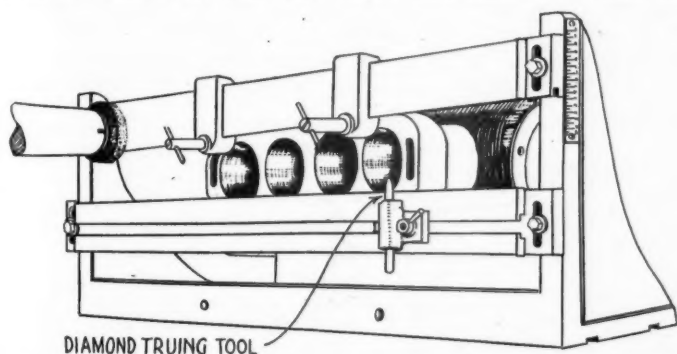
A typical stock fixture for holding and centering the cylinder block while it is being ground. The diamond truing tool is handily located and is movable on the adjustable cross bar of the jig. The grinding wheels are trued many times during the grinding operation.
